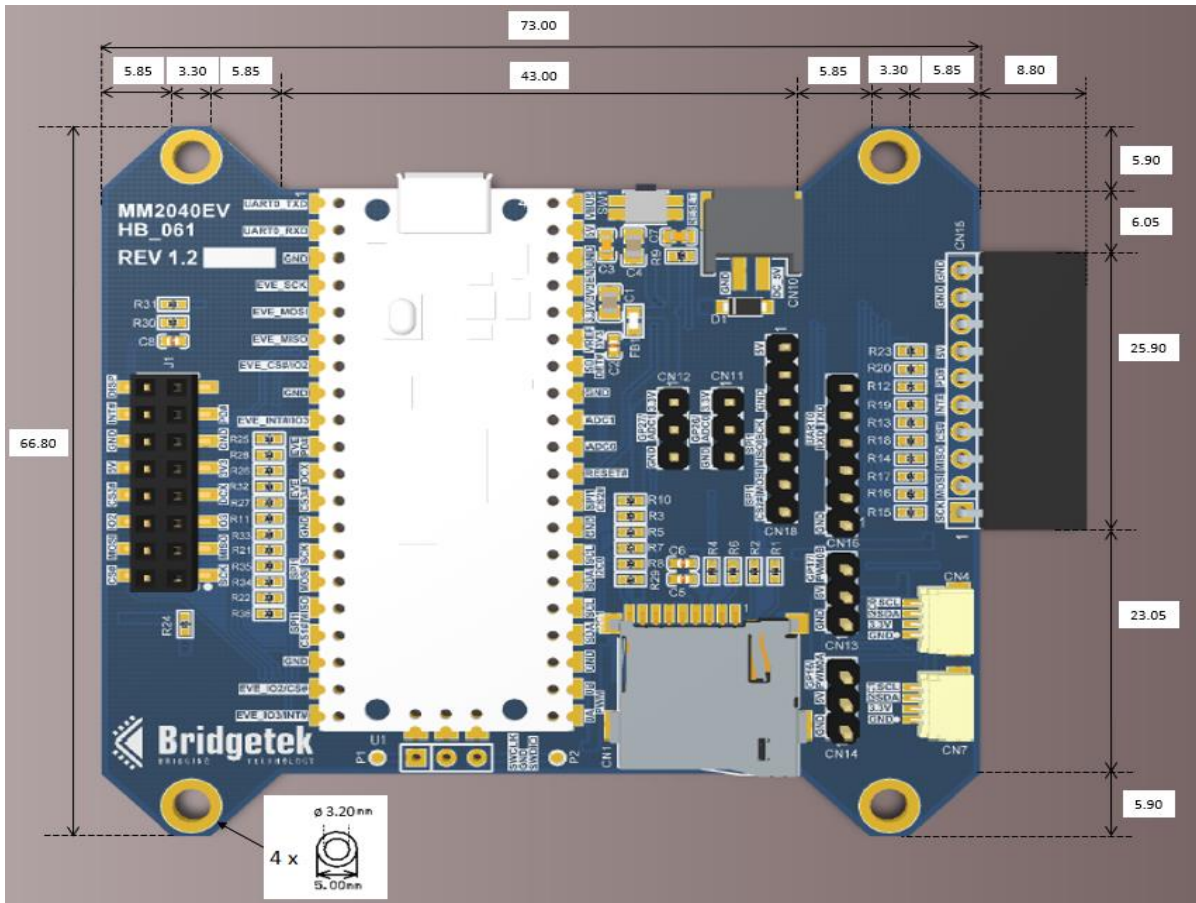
MM2040EV PICO Adapter Board PCB Dimensions (Top view)
